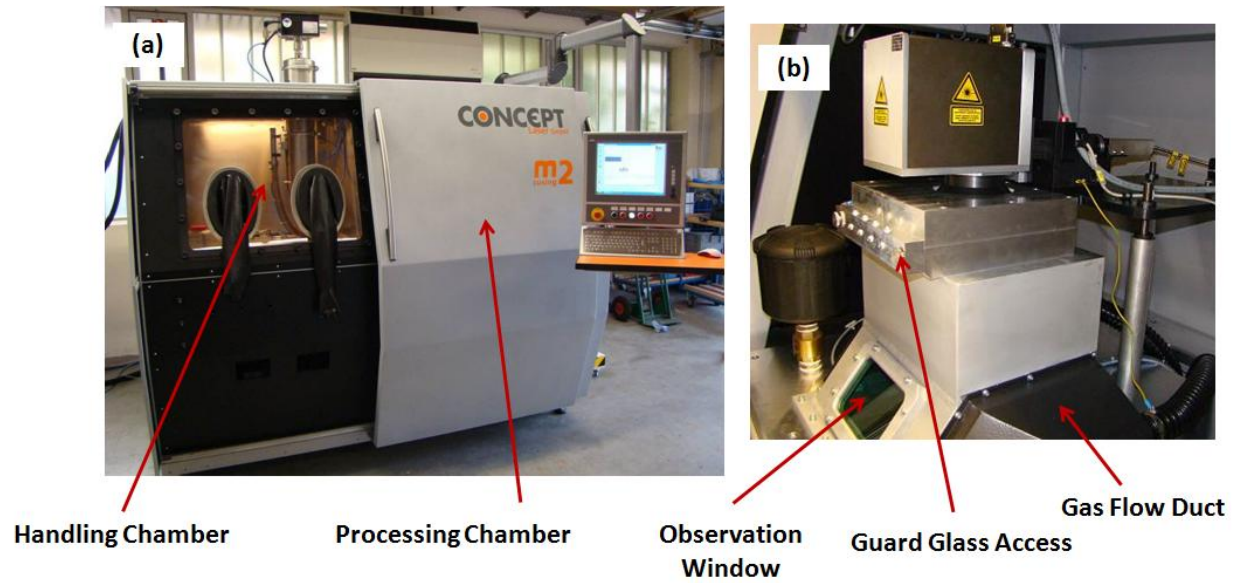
Photograph showing different views of the Concept Laser M2 system: (a) Front view of machine showing handling chamber; (b) Exterior view of the processing chamber.
